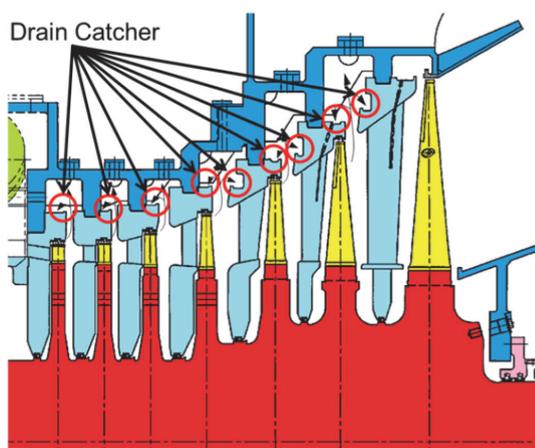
Schematic drawings of drain catcher mechanism. (Online version in color.)
